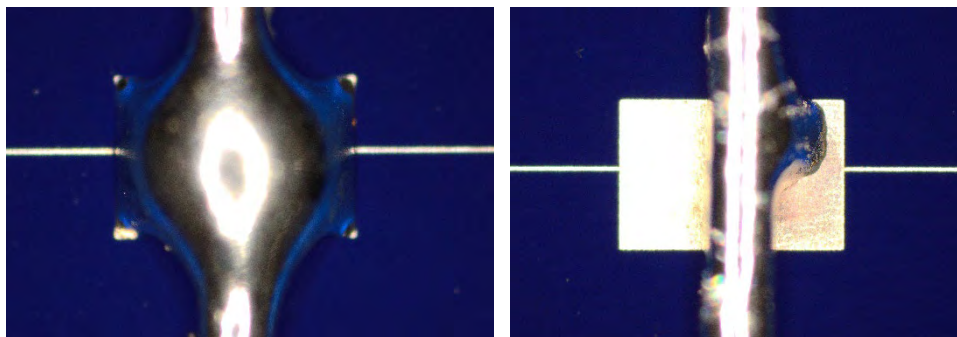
Optical microscope images of contact pad and wire interconnect with adequate solder spread and wetting (left) and inadequate wetting (right).
